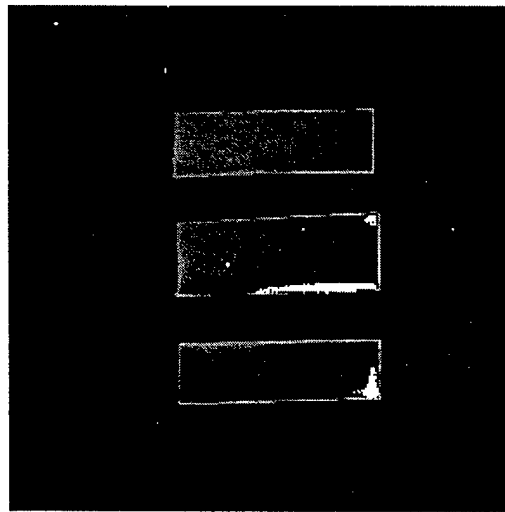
Thermal wave image of adhesive joint (A-untested specimen, B-tested with mechanical load-partially cracked, C-tested with mechanical load-completely fractured)
